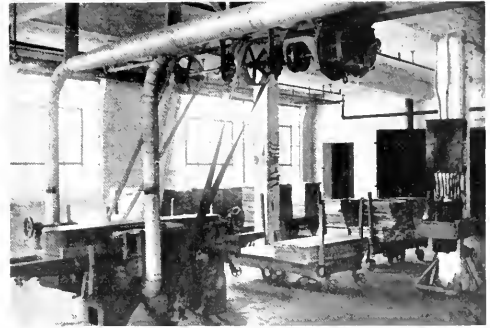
A 10 HP, 850 R.P.M. SQUIRREL-CAGE MOTOR, FLEXIBLY COUPLED TO THE END OF THE COUNTERSHAFT OF A CONTINUOUS SPEED GLUE JOINTER
